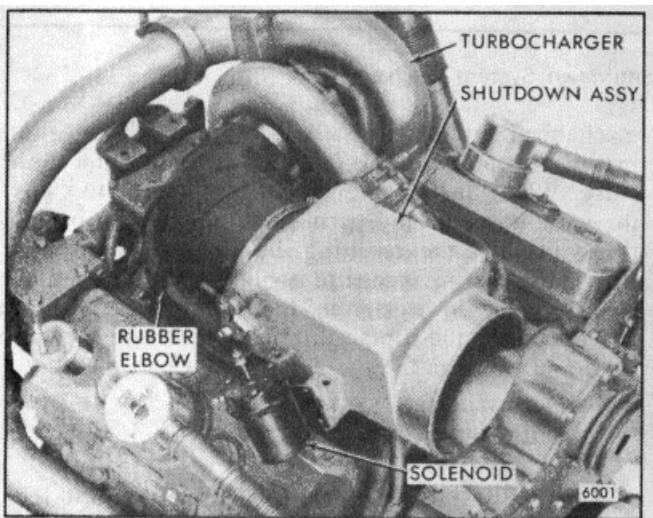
Emergency Shutdown Assembly (Direct Mounted Turbocharger)
